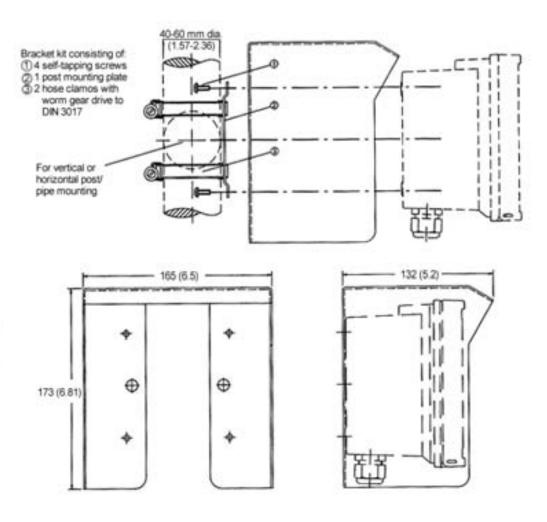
Dimension Drawing for APT2000 with Wall or Pipe Mounting
